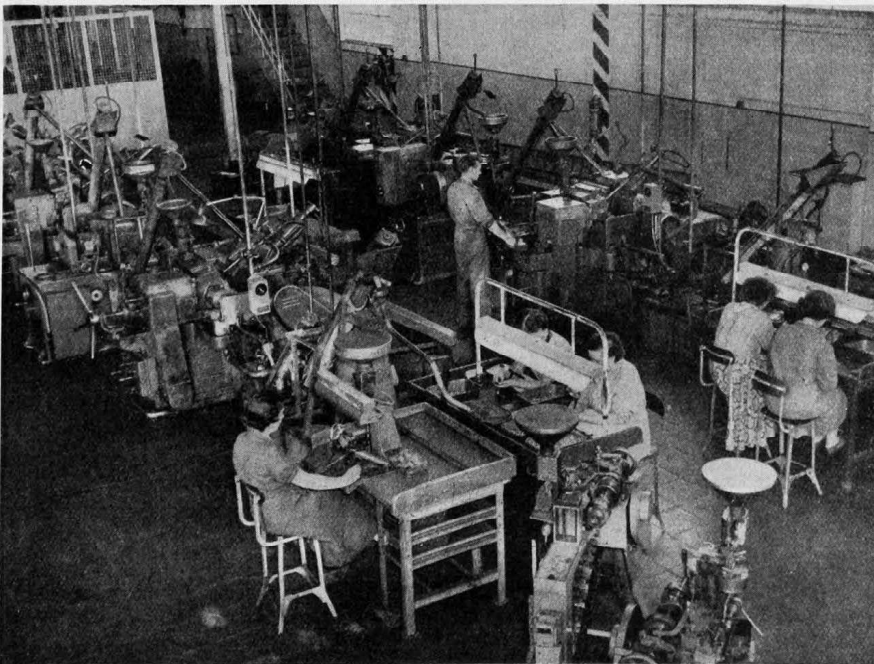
Roller production line with visual inspection benches and grading machines in the foreground
